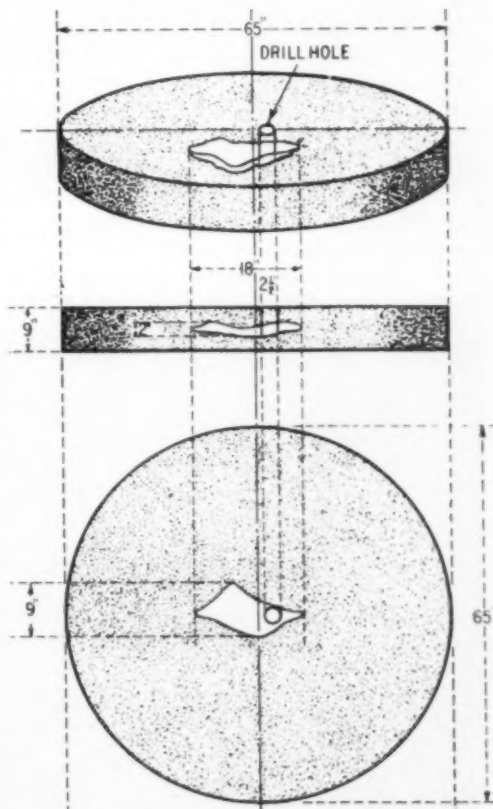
Defective grid-plate forgings as shown by ultrasonic inspection
